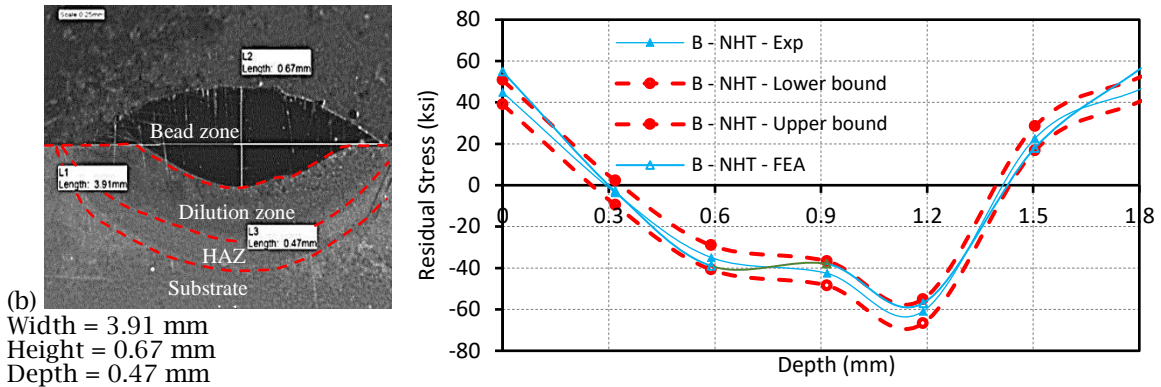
A single laser clad bead, showing the dilution and heat affected zones.
